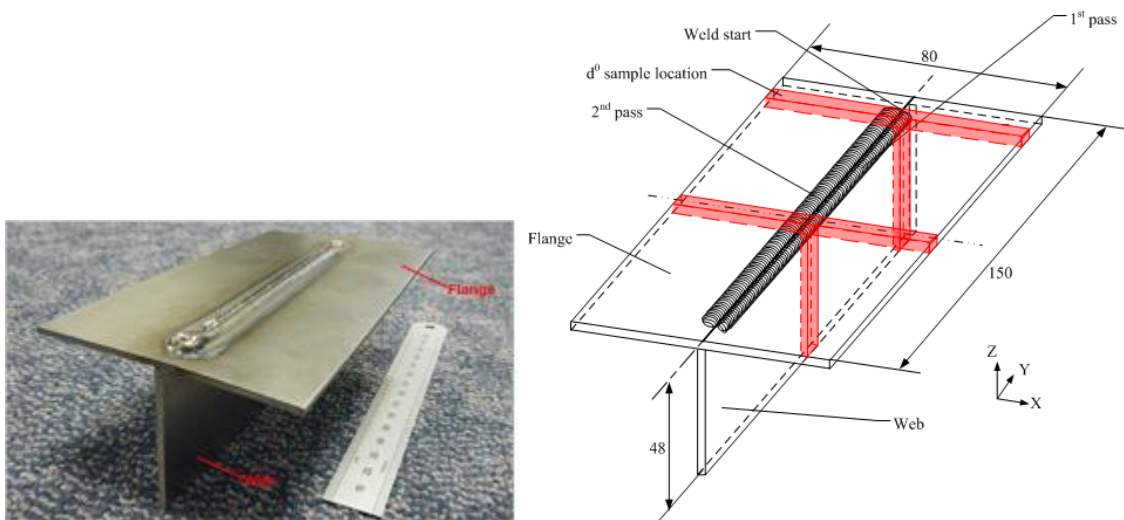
Schematic drawing of Ti-6Al-4V flat T-joint weld measured by synchrotron X-ray diffraction.
